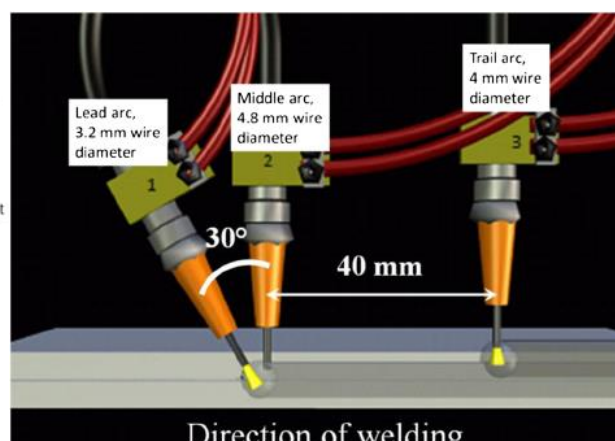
Arrangement of three welding arcs in the welding setup (Layus et al., 2014)
